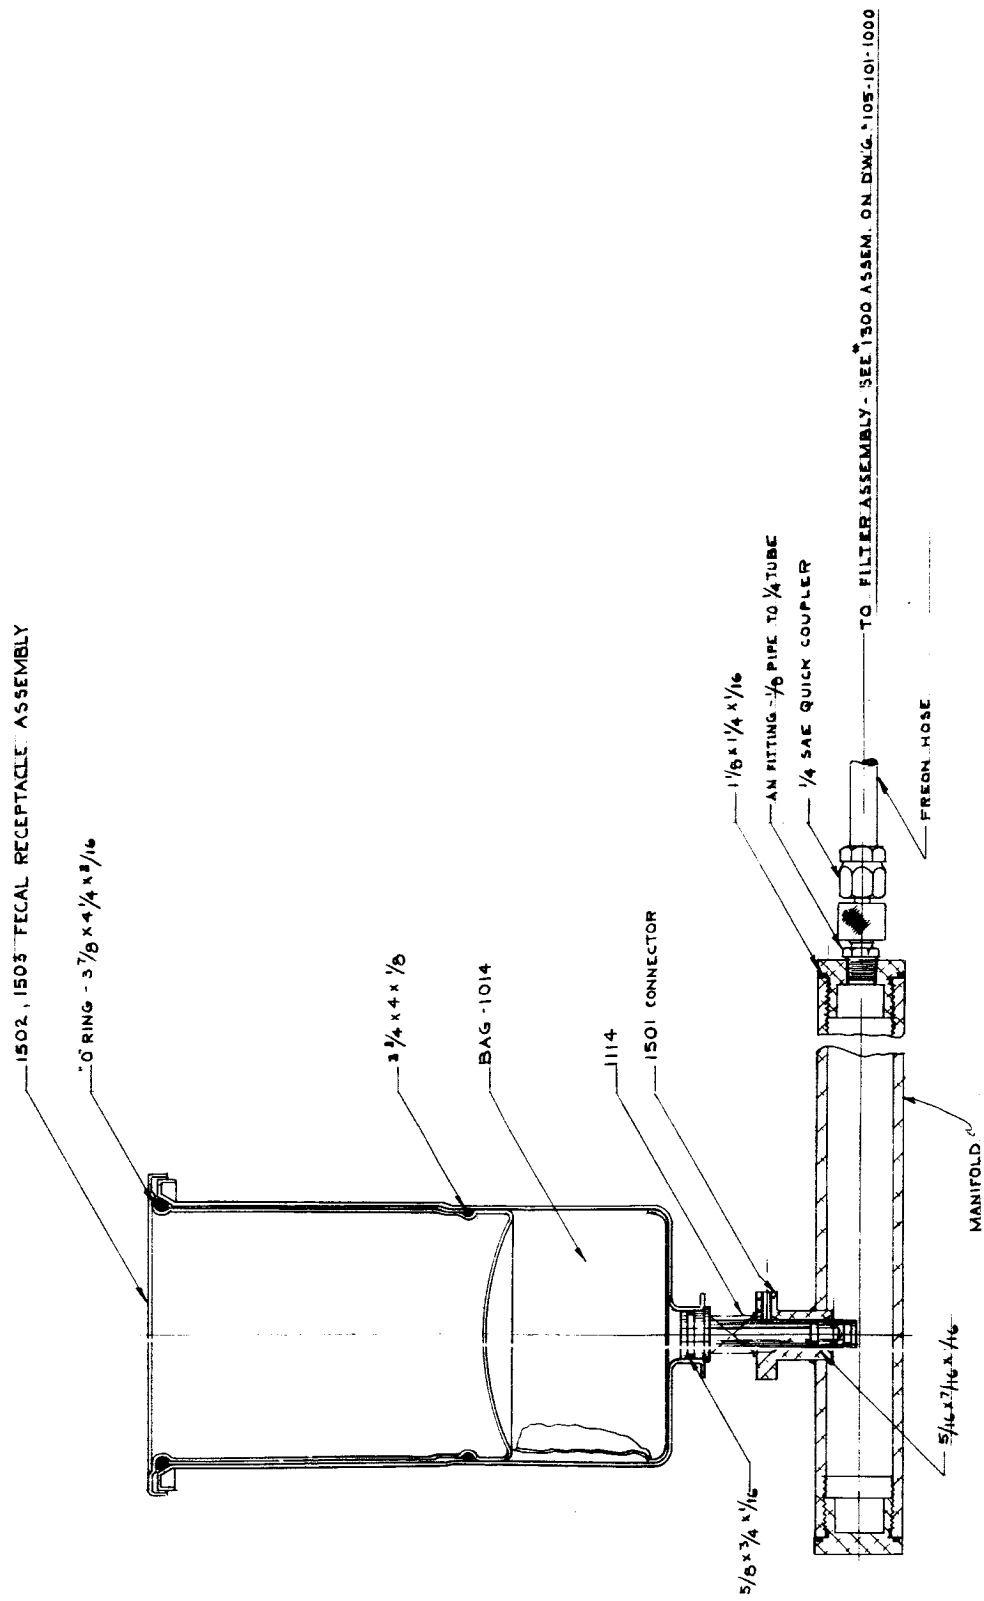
ASSEMBLY DRAWING OF FREEZE DRIER UNIT
